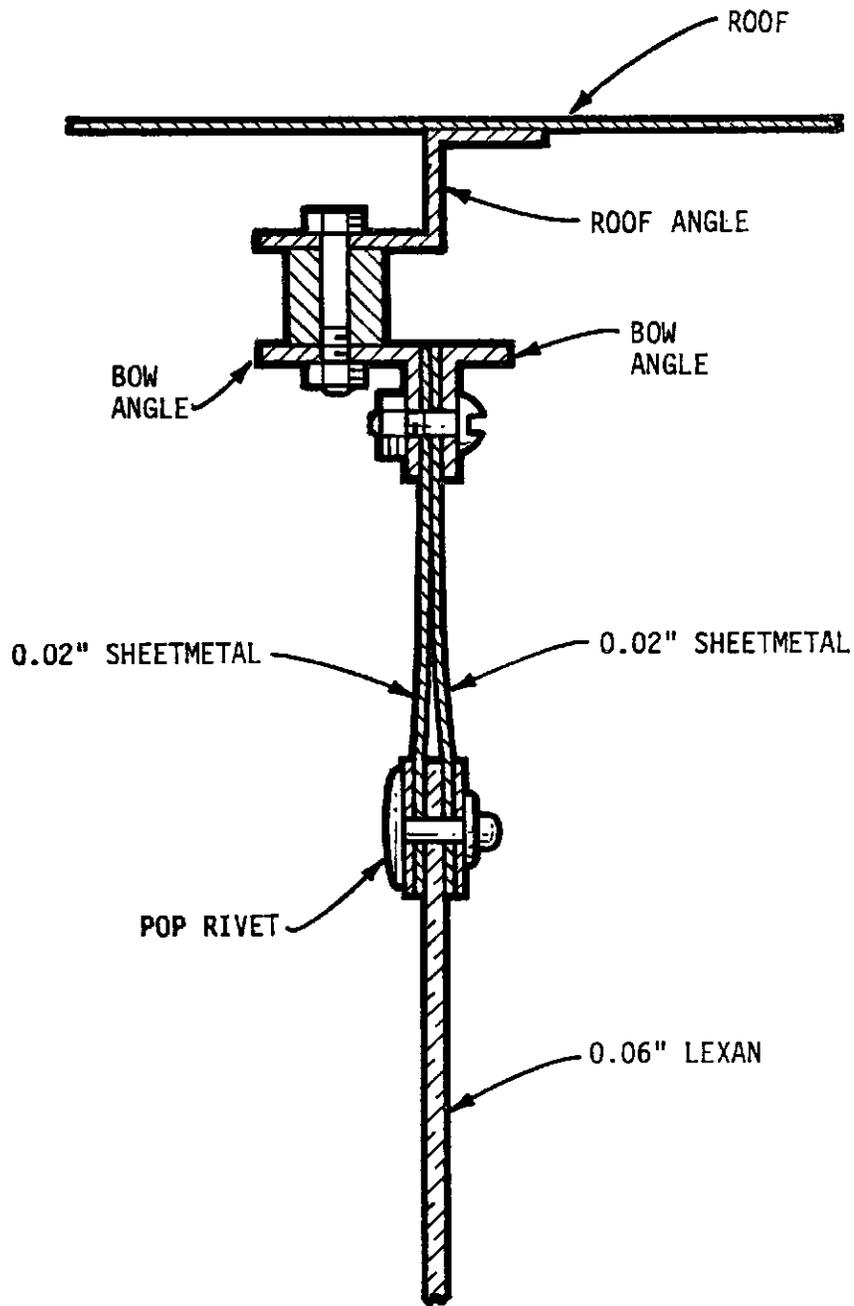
FRONT SEAT/ROOF ATTACHMENT ASSEMBLY
